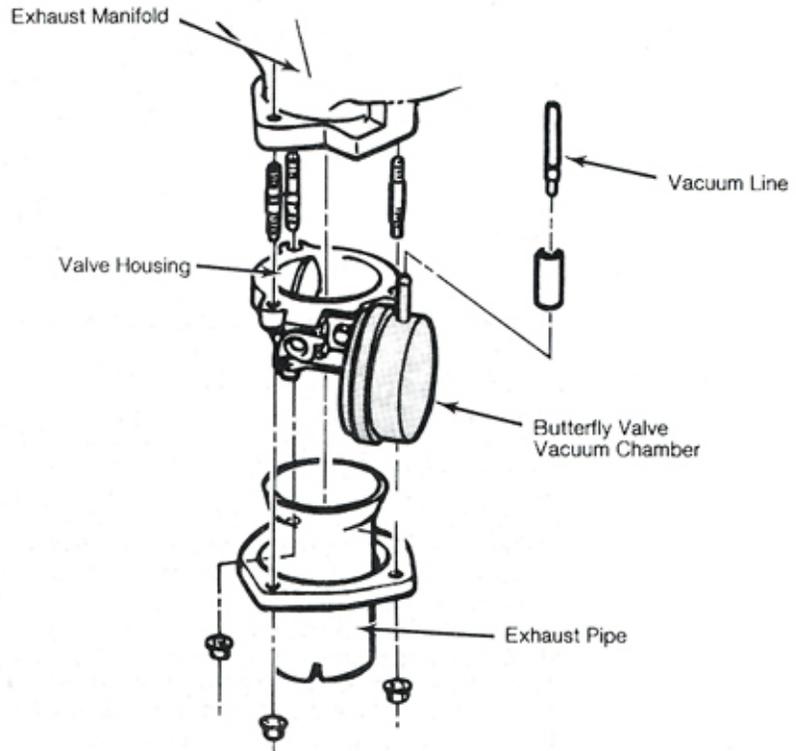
Manifold Vacuum Controlled Butterfly Valve
